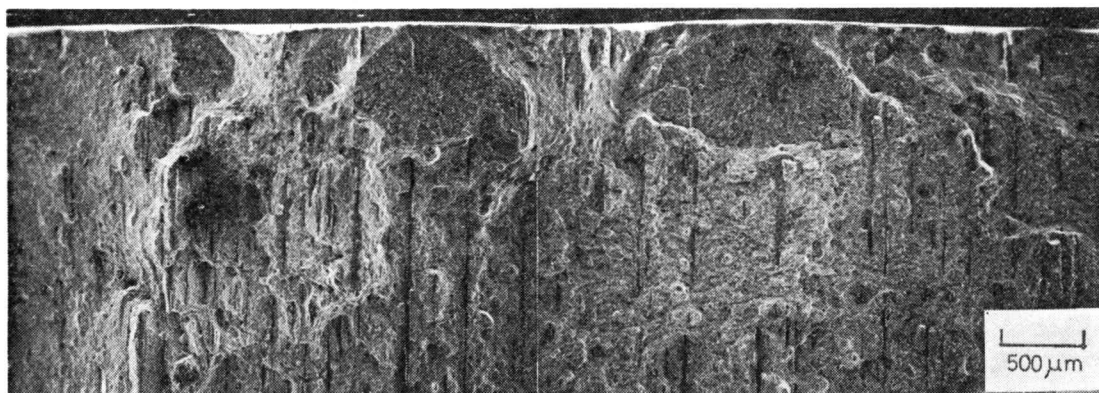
Fractograph of vicinity of specimen surface on static bending test
